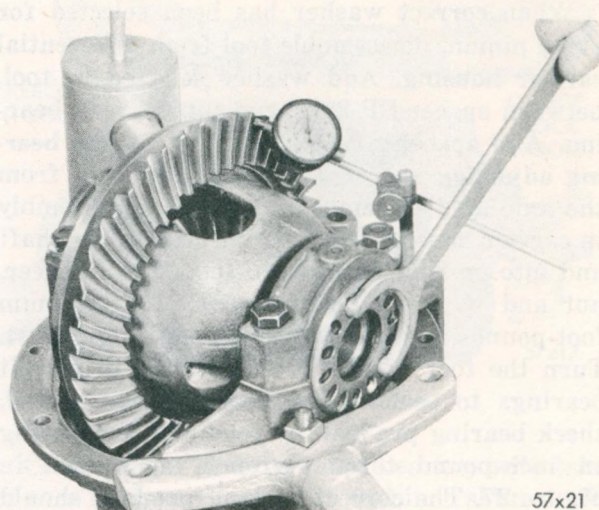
Checking Backlash Between Drive Gear and Pinion
